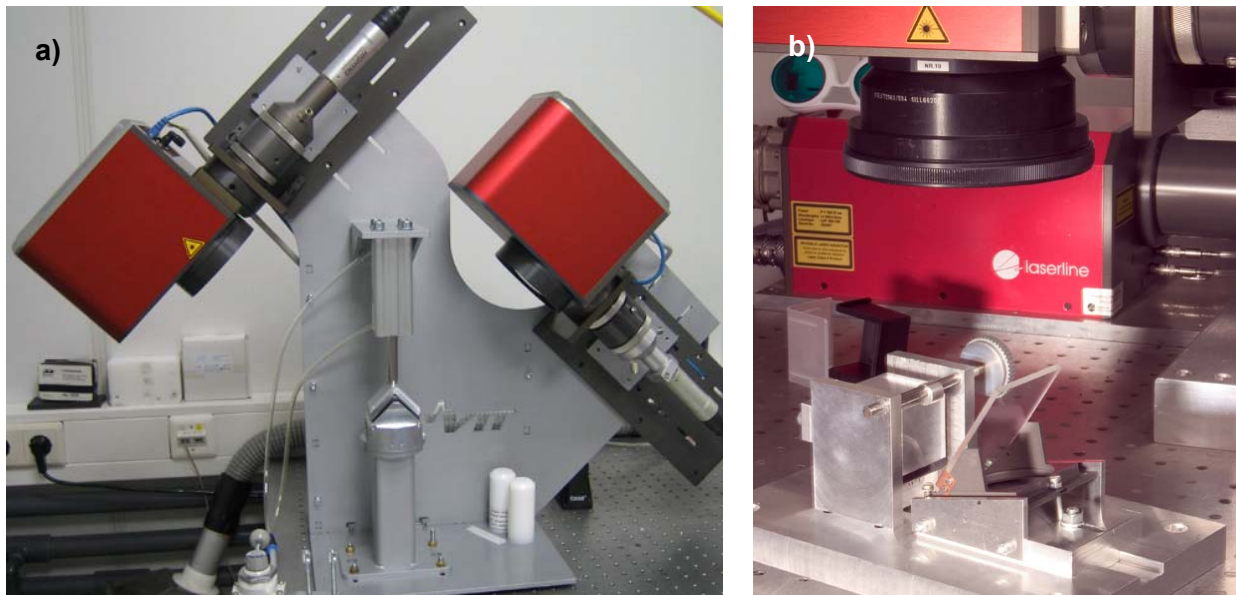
The setup of quasi-simultaneous 3D welding with a) two scanner system and b) mirror + scanner system.
